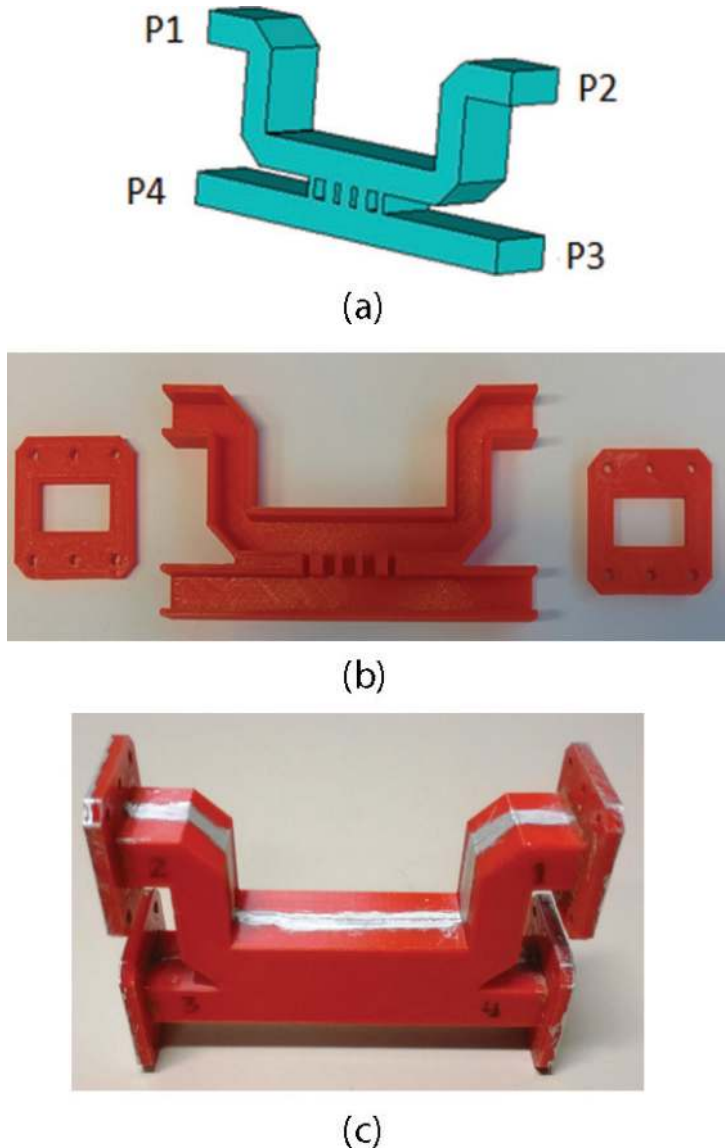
(a) Layout, (b) printed half, and (c) assembled and metallized branch-line coupler.
